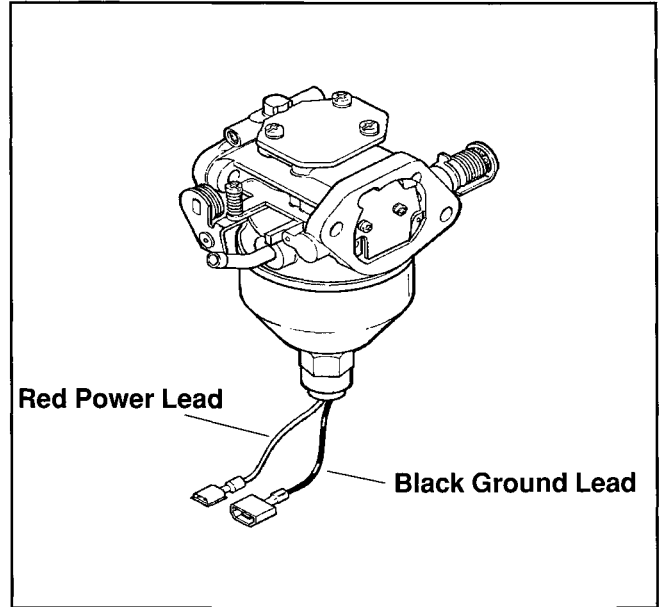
Fuel Shut-off Solenoid Equipped Carburetor.
